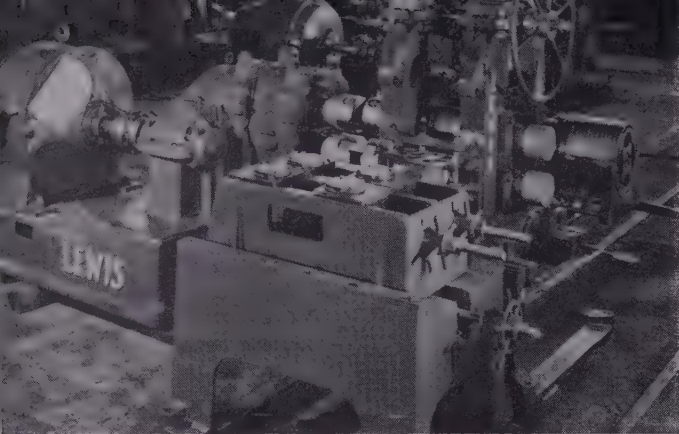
Two-high temper mill for narrow strip with edging rolls on entry side of mill. Grooves for various strip thicknesses can be noted on vertical rolls in the foreground. View shows mill before its installation. Lewis Foundry & Machine photo
